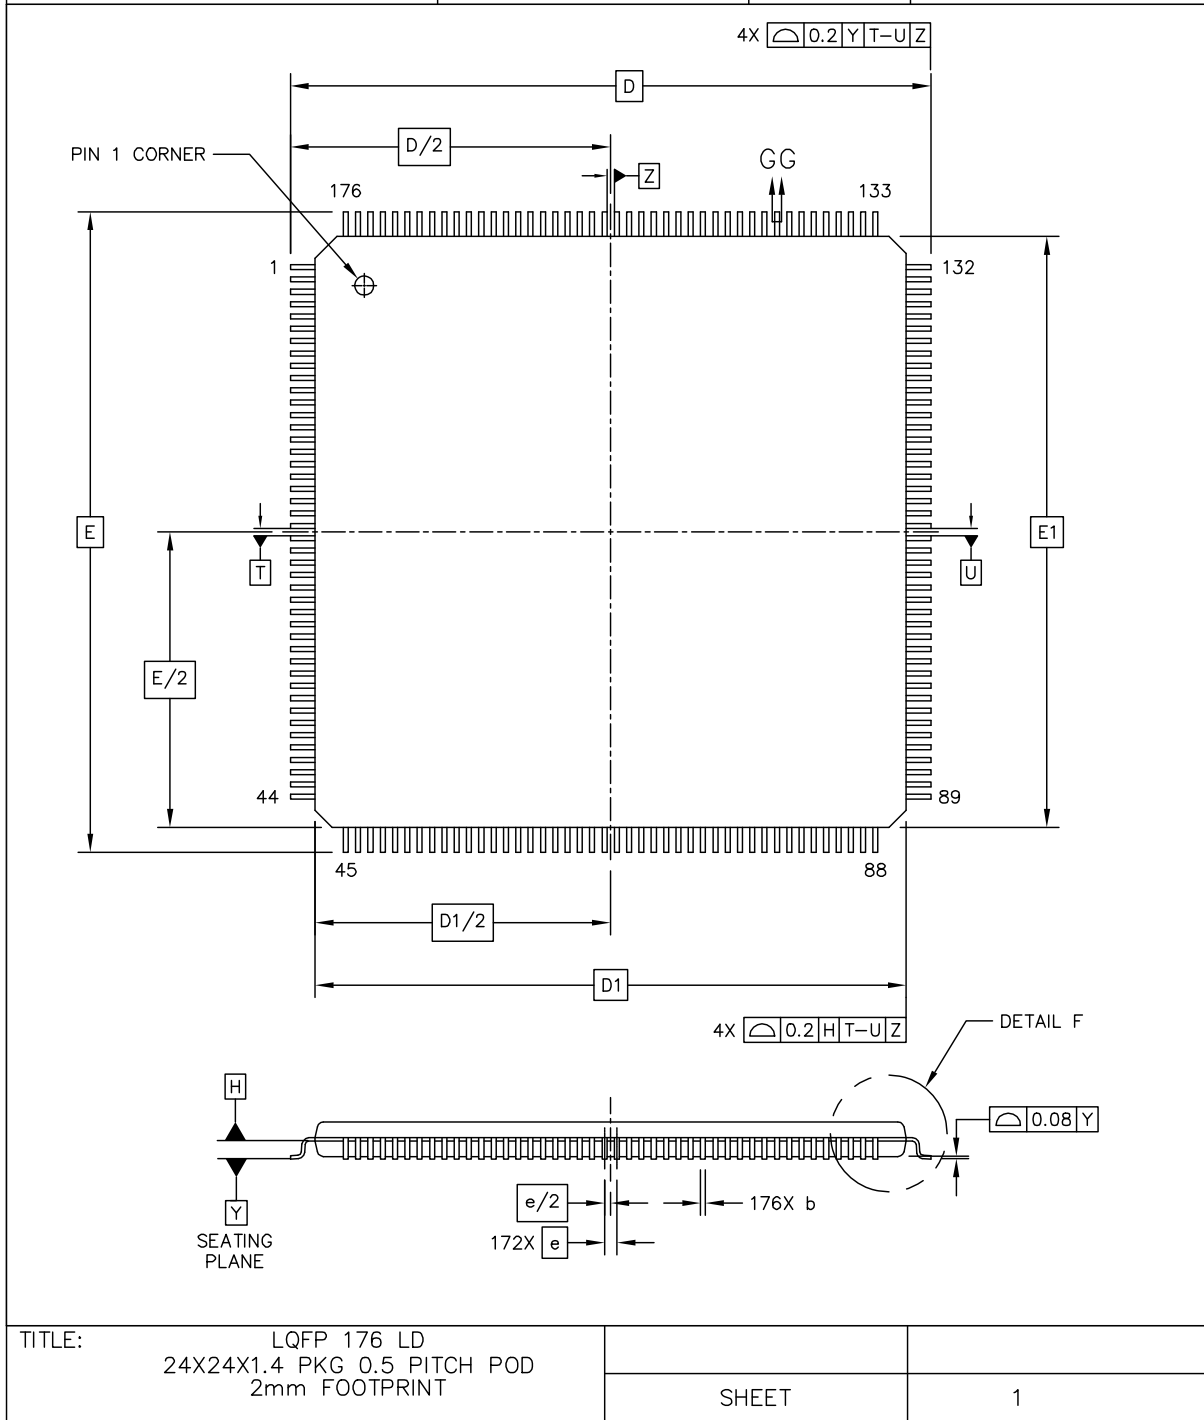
176 LQFP mechanical drawing (Part 1 of 3)
